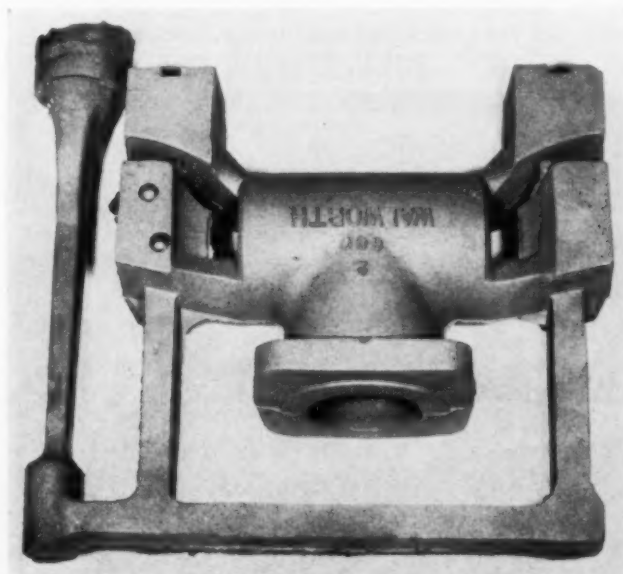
Industrial casting, weighing about 35 lb, made of low-carbon steel modified with 1.5 per cent extra silicon in a shell mold containing 3.0 per cent Fe_2O_3 .
